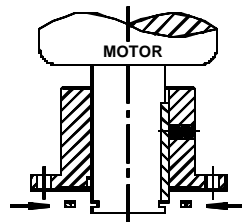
SLIDE (TAP) FLANGE ON SO THAT IT CLEARS CIRCULAR KEY GROOVE.
